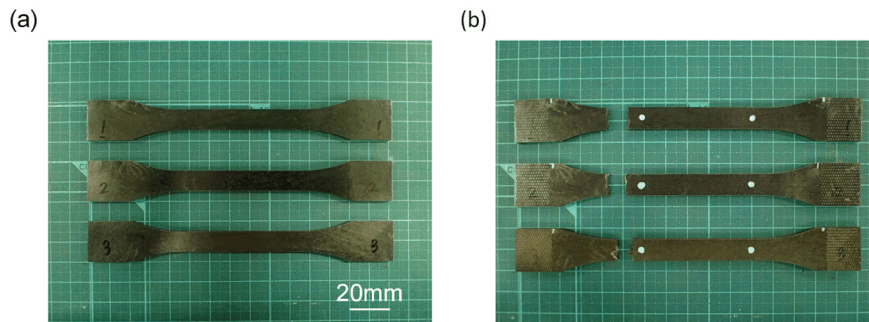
(a) Tensile test specimens and (b) the fractured specimens after tensile test with the white dots showing the measuring locations by video extensometer.
